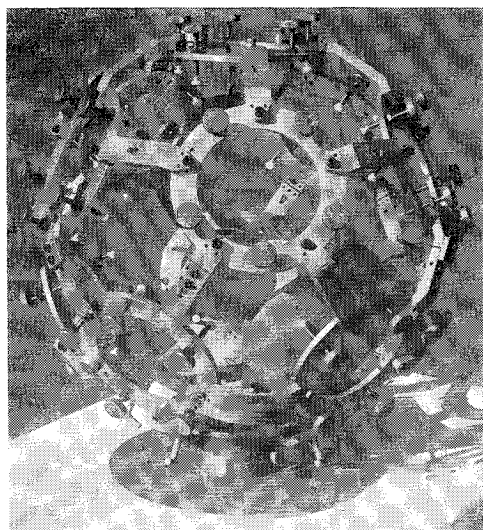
Assembly fixture for 15-in.-diam hull model.
